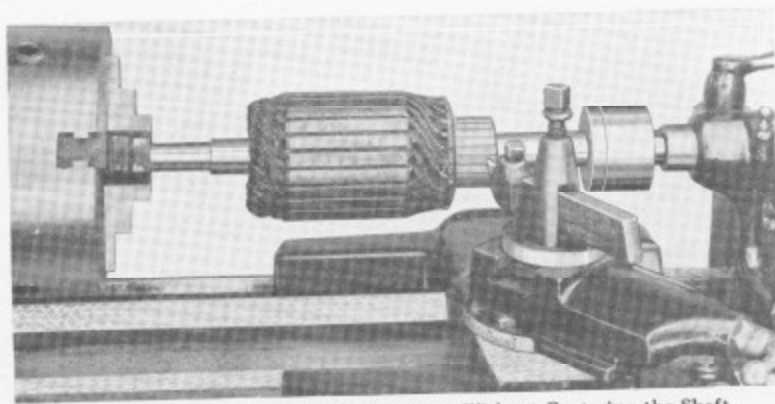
Truing an Armature Commutator Without Centering the Shaft
